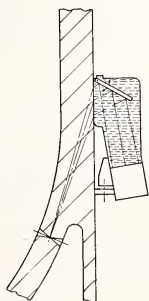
Sketch of the pressurizer lower head weld. Principle of ultrasonic testing.
